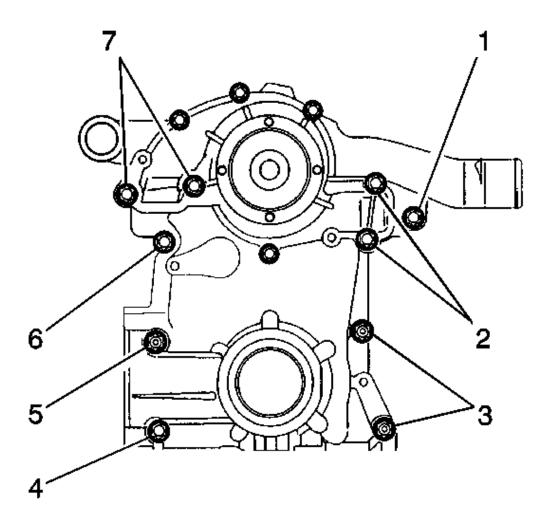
Engine Front Cover Gasket Courtesy of GENERAL MOTORS CORP.
